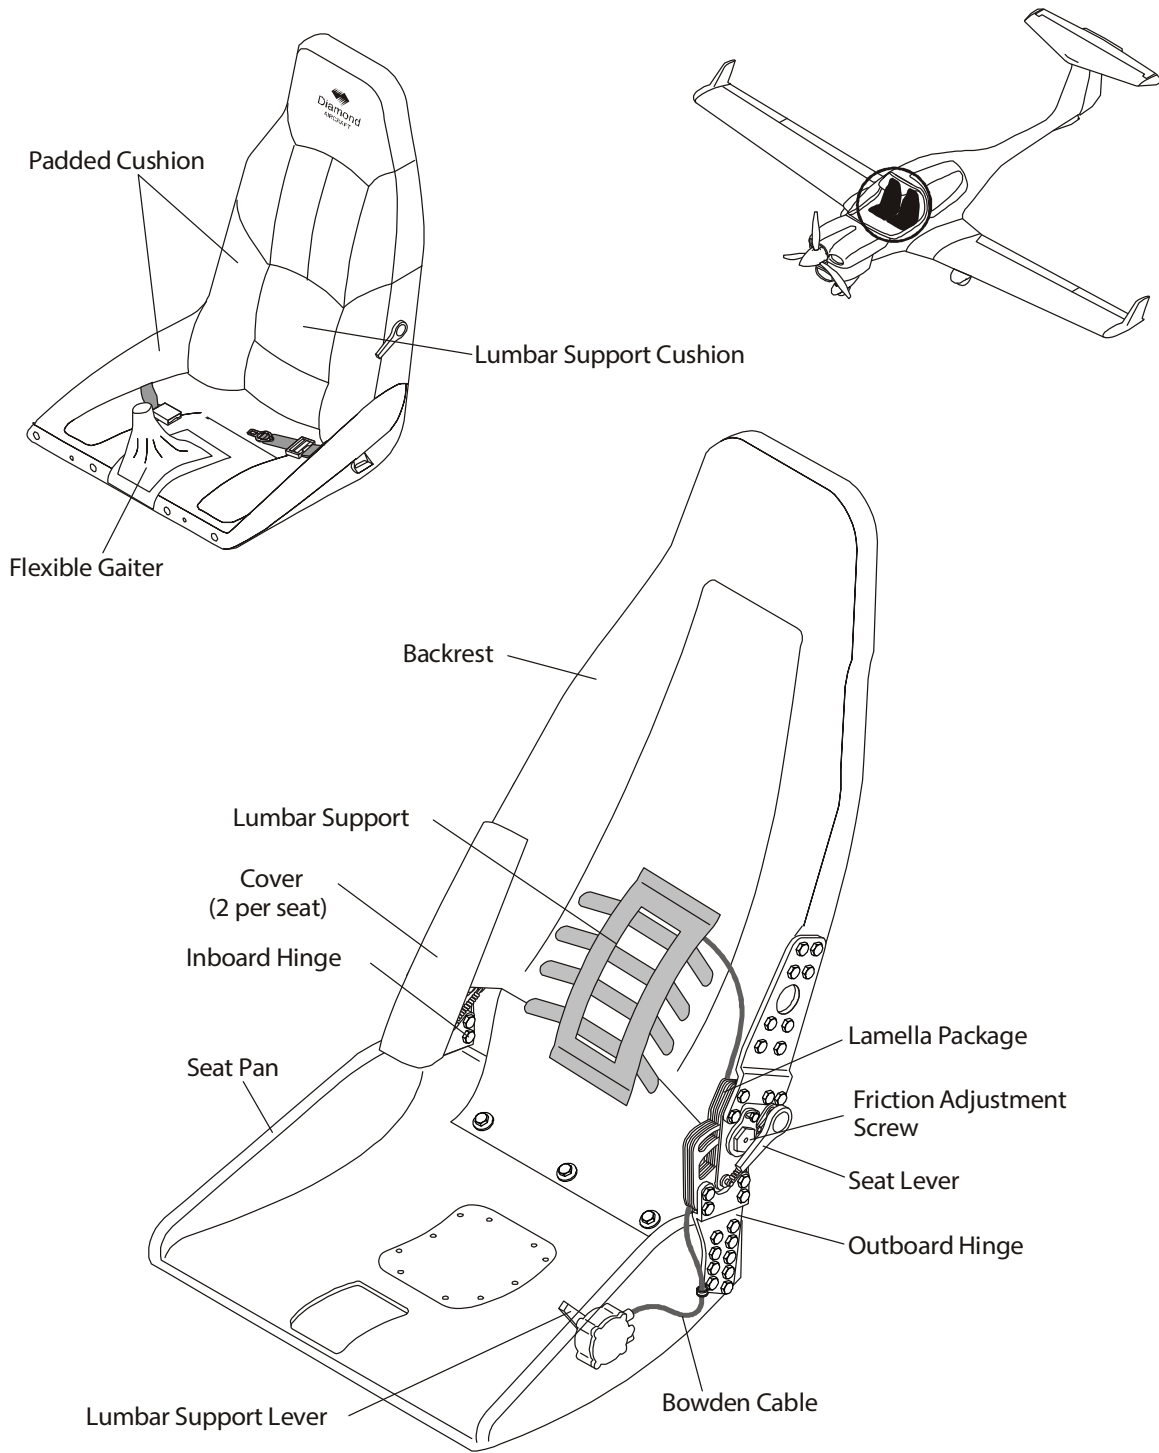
Pilot's Seat Installation (if OÄM 40-252 is installed)
